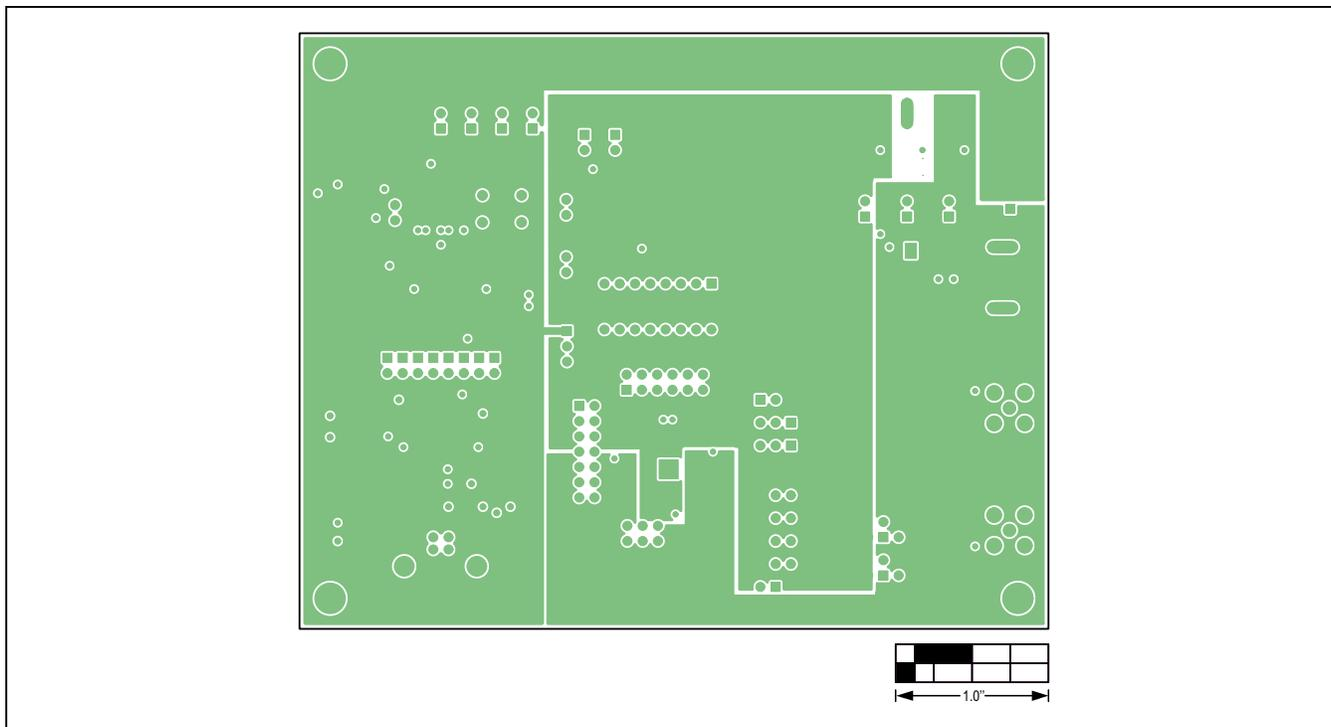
MAX9271 Coax EV Kit PCB Layout—Power Layer 3
